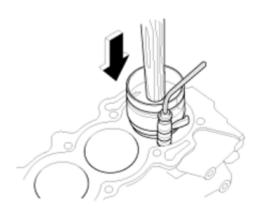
Installing Piston & Connecting Rod Courtesy of KIA MOTORS AMERICA, INC.
